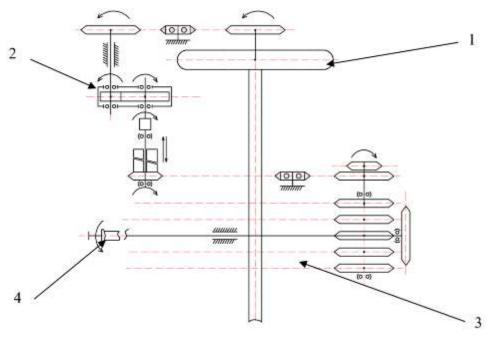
The kinematic scheme of transportation conveyor 1 –drive wheel; 2 – reducing; 3 – conveyor belt; 4 – cardan shaft
